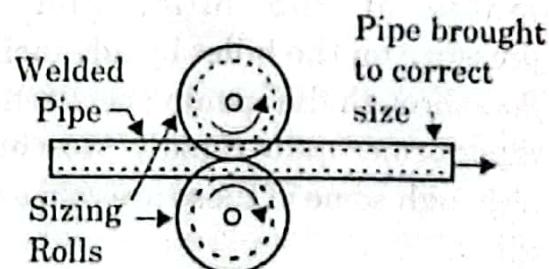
Production of a continuous butt-welded pipe.
